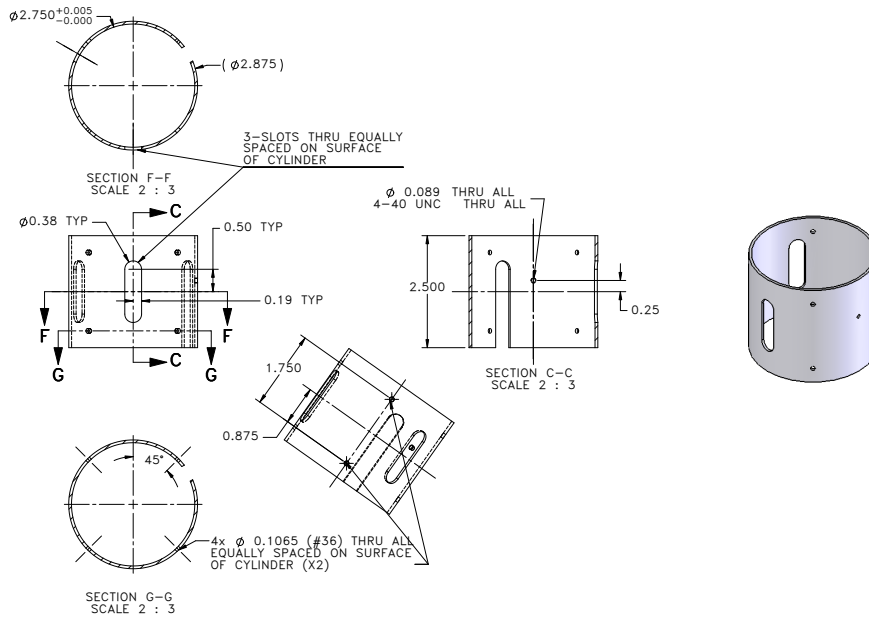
Technical drawing of the RFA cylindrical shell. All measurements are in inches
